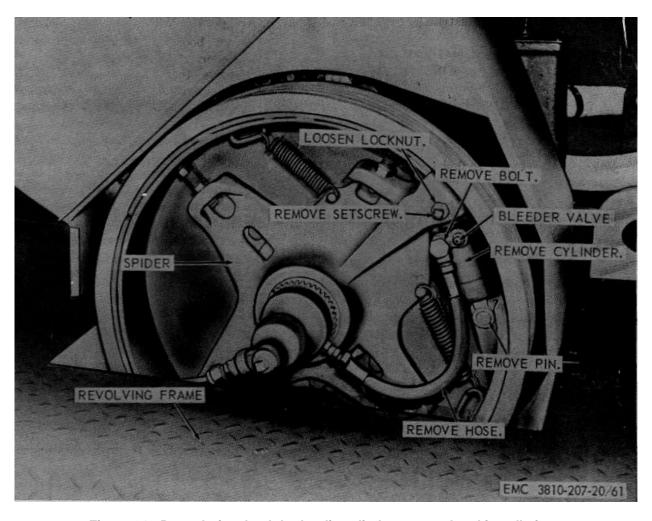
Boom hoist clutch hydraulic cylinder, removal and installation.
